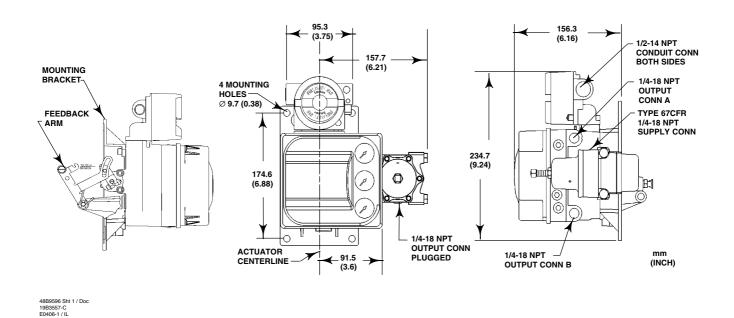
Dimensions for Type DVC6020 Digital Valve Controller with Integrally Mounted Filter Regulator
